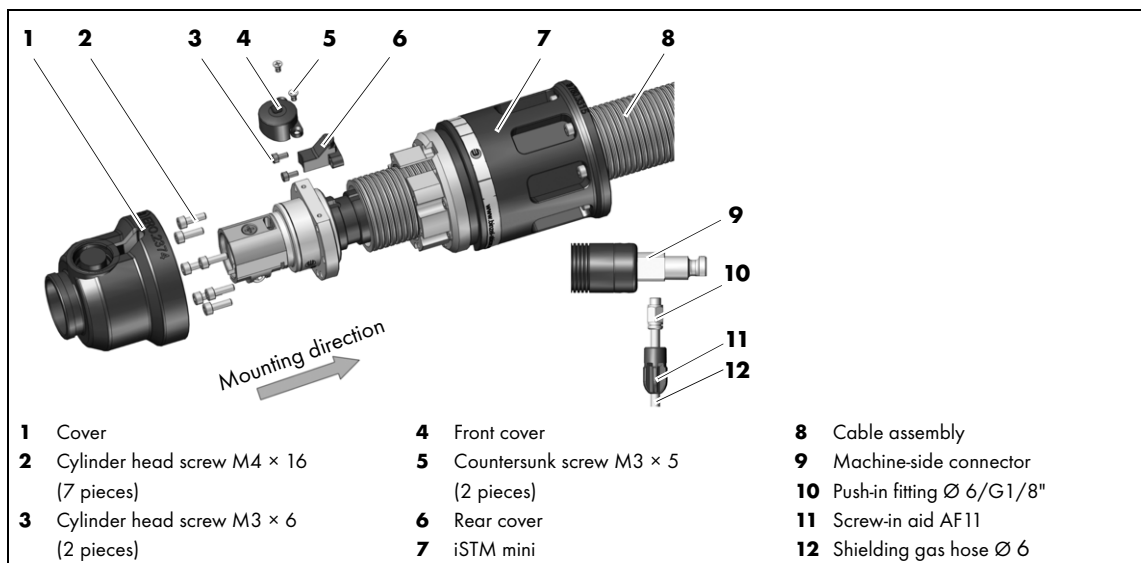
Mounting the cable assembly iSTM mini for ABIROB® G
